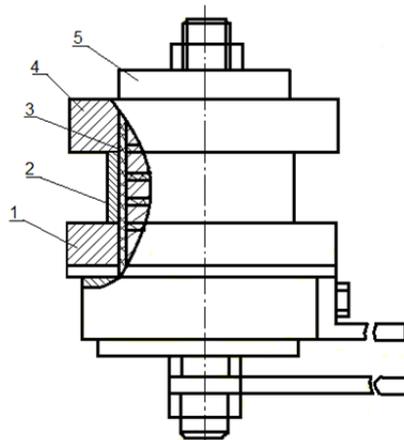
Experimental equipment: 1, 4 – shading rings; 2 –specimen; 3 – bushing; 5 – inductor
